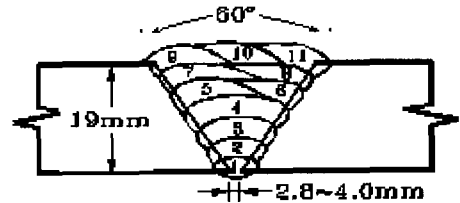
Schematic diagram of specimen and welding procedure
